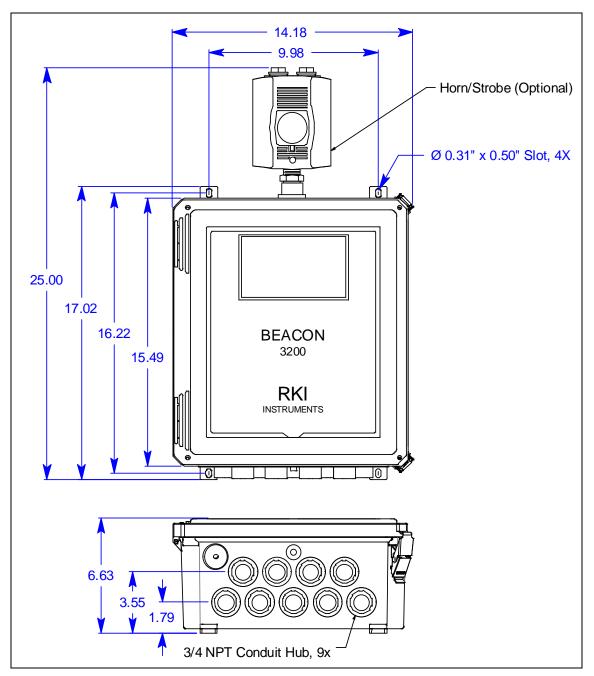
Outline and Mounting Dimensions with Horn/Strobe Installed
